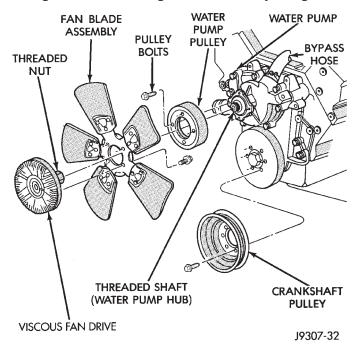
Fan Blade and Viscous Fan Drive—5.2L V-8 Engine
